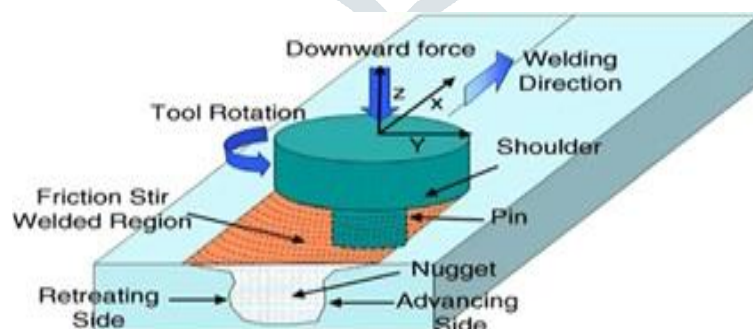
Schematic drawings of friction stir welding (Mishra & Ma, 2005).
